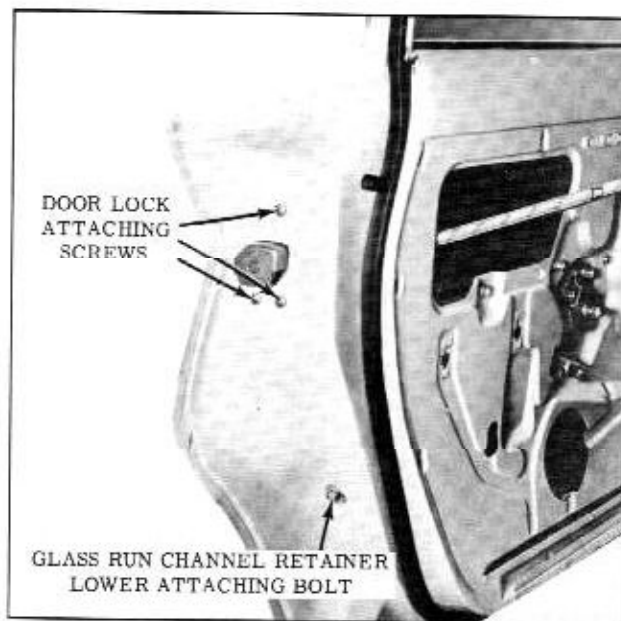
Rear Door Lock and Glass Run Channel Retainer Attachment
